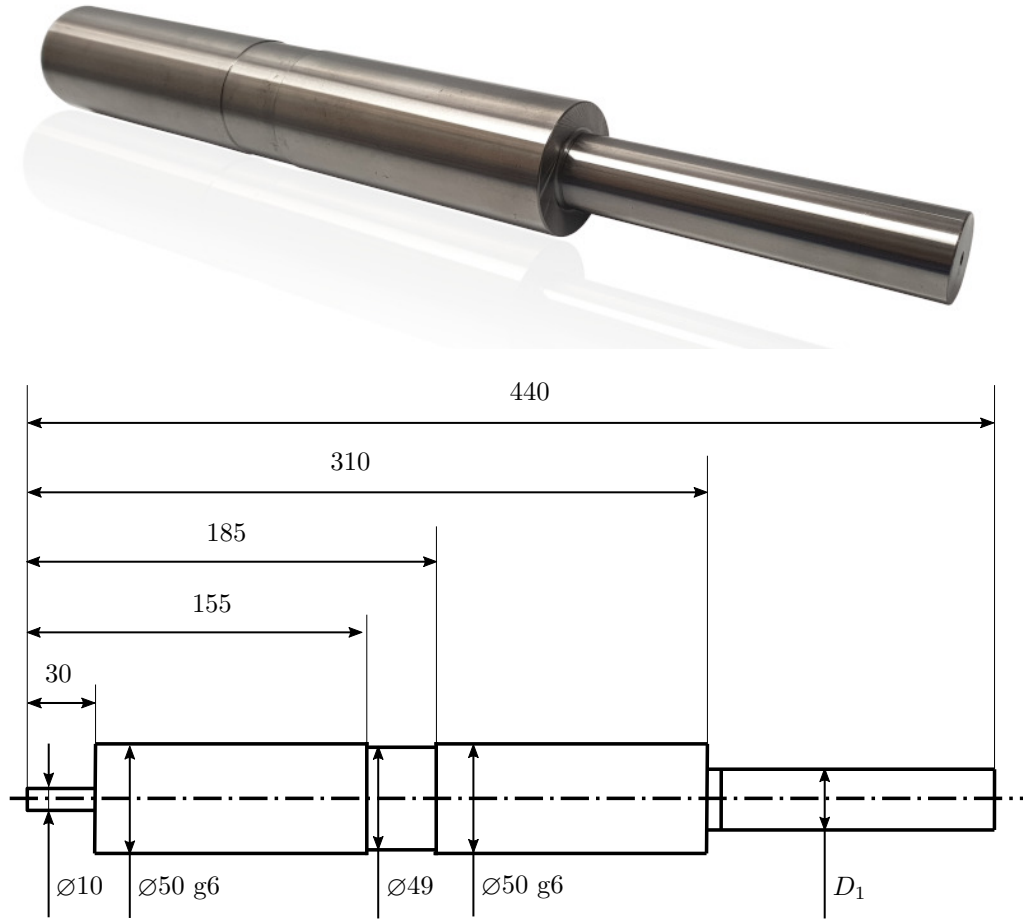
Top: shaft after the performed experiments, bottom: dimensions of the shaft [102]
